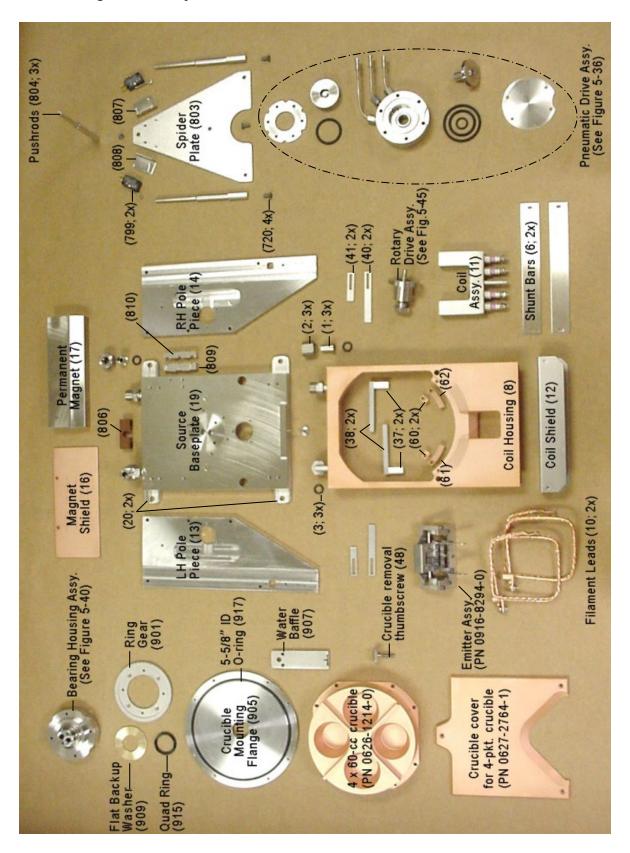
Major Piece Parts and Subassemblies of 3PT Source
